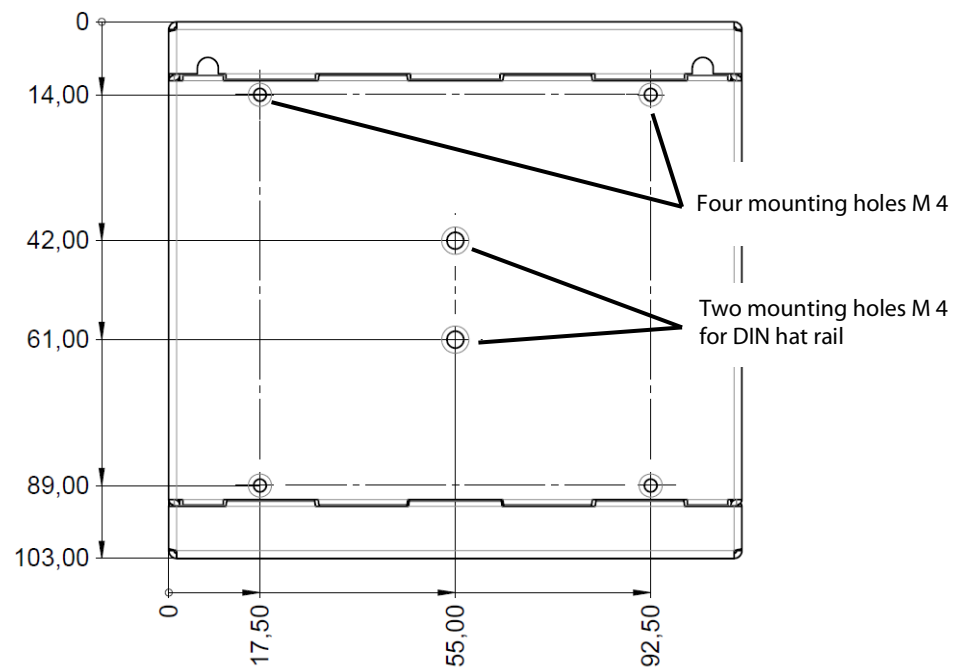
MBox-V-E39 / MBox-VH-E39, Dimensions of Mounting Holes (mm), Bottom View
